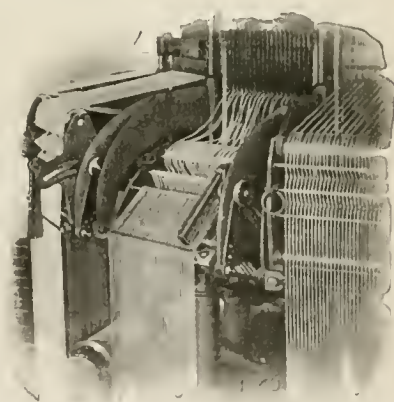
TAKE-UP SECTION LOWERED TO SLACKEN TENSION OF WARP THREADS
